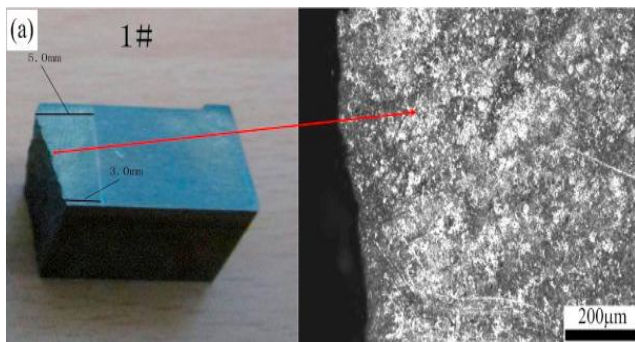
Metallographic morphology of the rail welding joint and fracture surface edge (Yu *et al.*, 2015).
